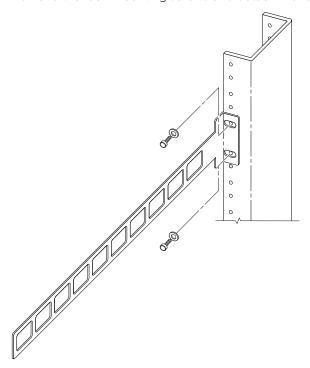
Removing the Rear Mounting Brackets—Two-Post Rack
